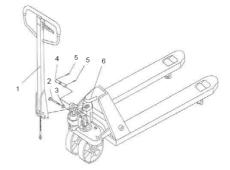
Tiller assembly (graphic illustration) (1 Tiller / 2 Screw / 3 Nut / 4 Bolt with bores / 5 Dowel pin / 6 Chassis with pump unit)
